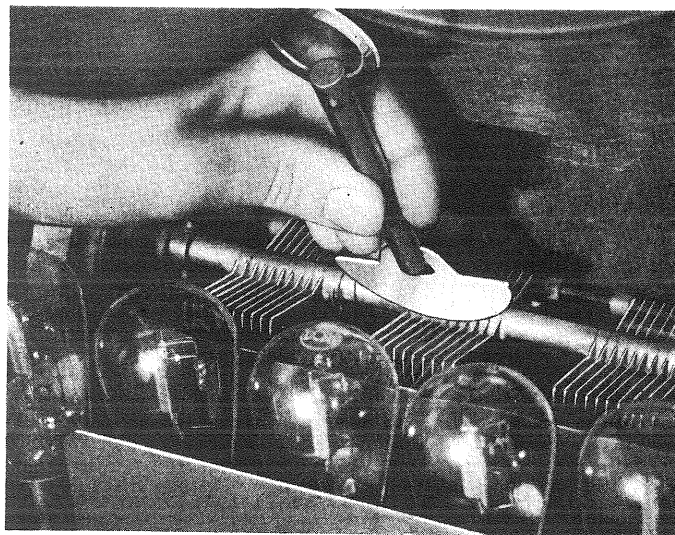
Checking condenser alignment in the three-gang tuning condenser assembly
